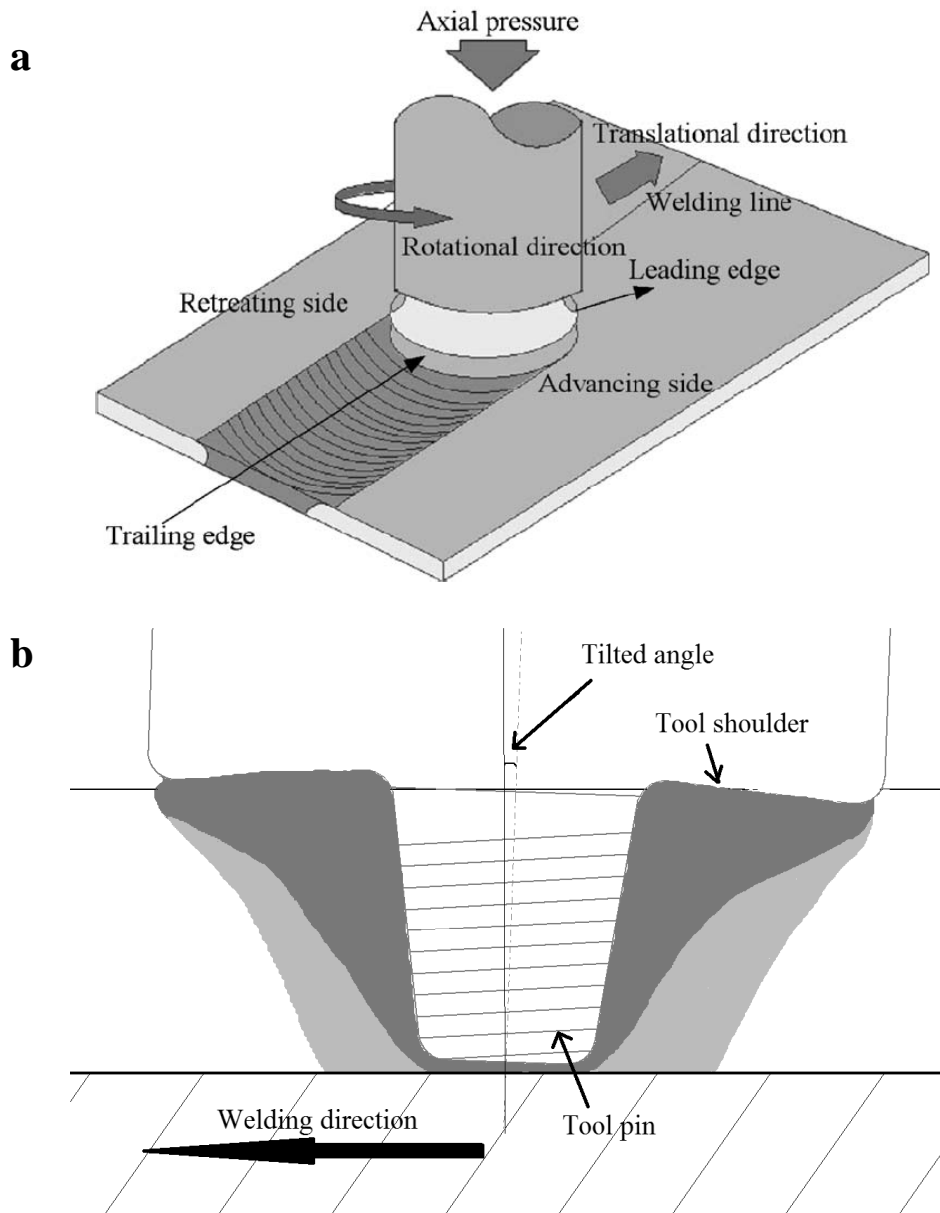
Schematic diagram of (a) the FSW<sup>37</sup> and (b) welding tool
